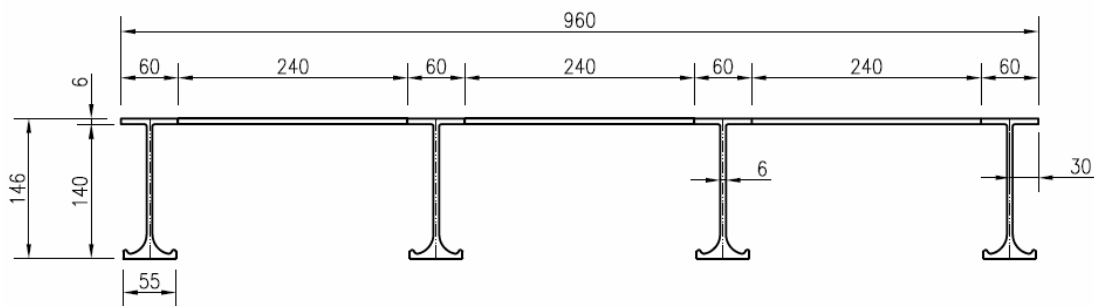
(b) Layout of test structure 20C for friction stir butt-joining in mm
